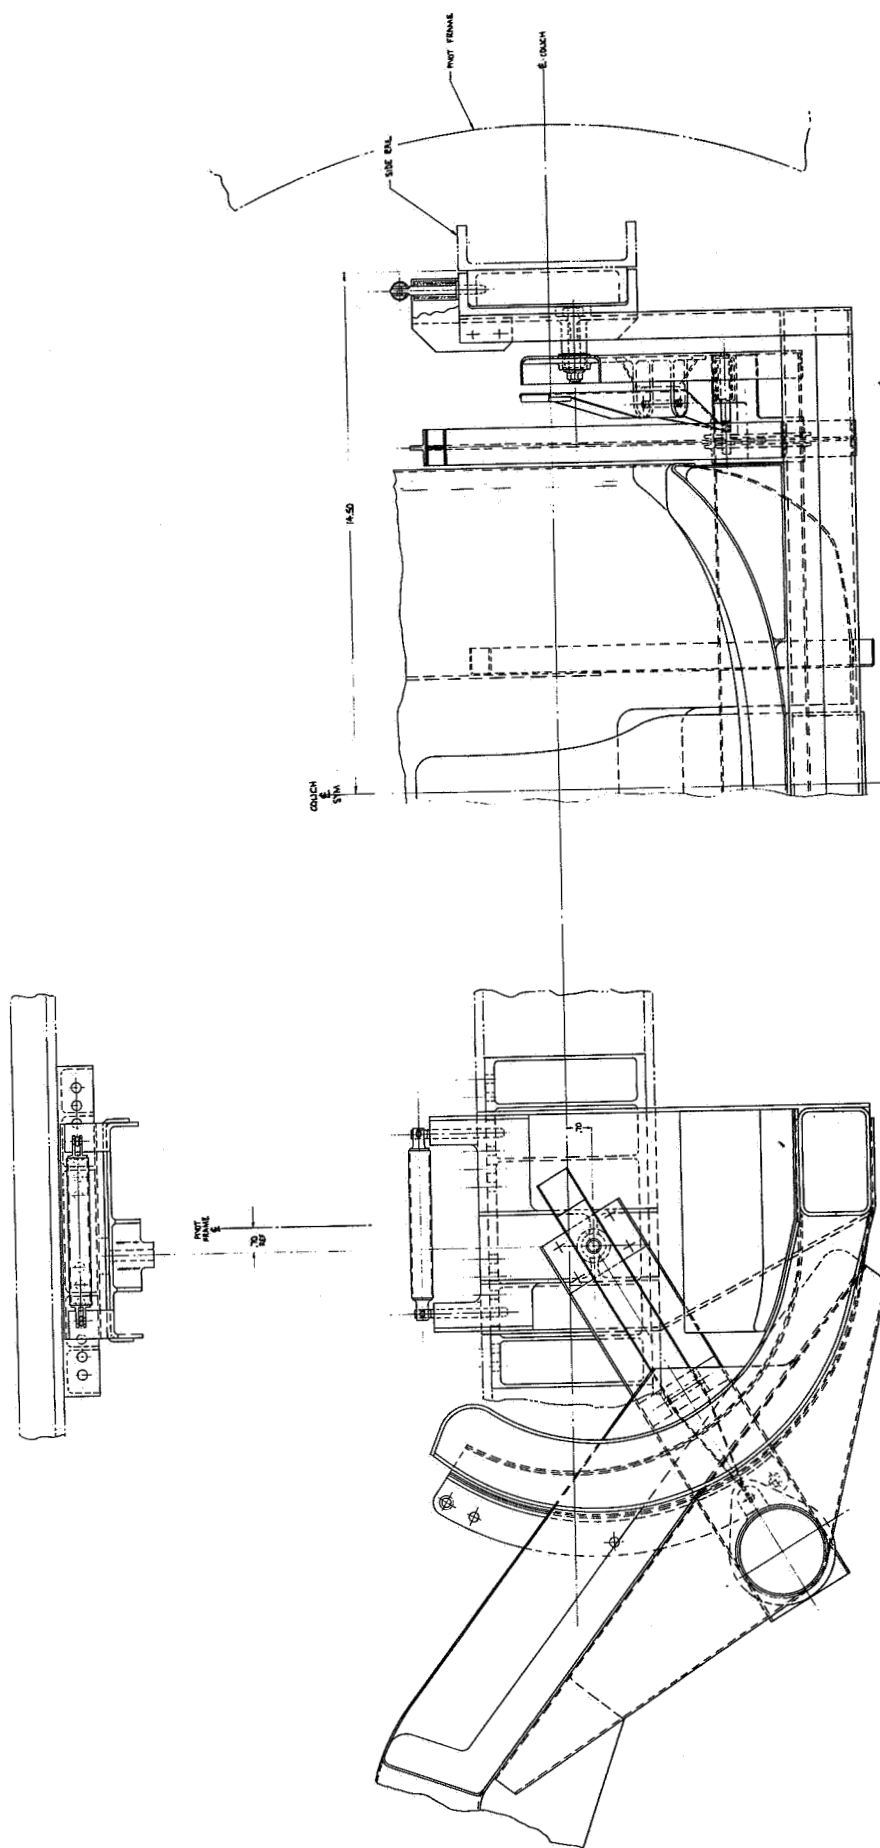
, 2. Couch Assembly - Space Research Centrifuge.
